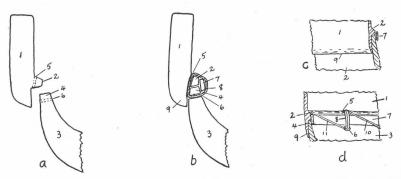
Double canoe, gunwale and hull lashing: a, sections of gunwale and hull ready to be fitted together; b, sections fitted and lashed; c, outside view; d, inside view. 1, gunwale; 2, inner flange; 3, hull; 4, upper edge of hull; 5, spaced flange hole; 6, spaced hull hole; 7, inside batten over seam, width slightly less than distance from upper edge of flange and hull hole; 8, lashing braid, passes inward down through flange hole and through hull hole from without, after two or more turns are made, goes diagonally upward on inside to next flange hole, when lashing turns made with that pair of holes—though lashing turns through gunwale flange hole confined to inner side, turns appear on outer side of hull, but, owing to downward projection of lower edge of gunwale, are concealed from outside; 9, lower edge of gunwale, overlaps and conceals lashings from outside; 10, braid ascending to flange hole to make two lashing turns (d, 8); 11, braid passing on to flange hole of next pair.
